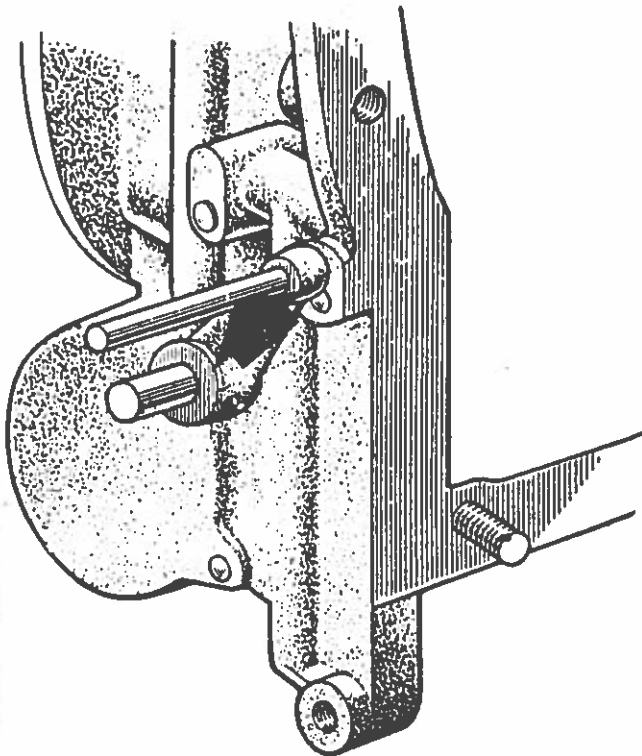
VALVE SETTING LEVER (ARROWED)
